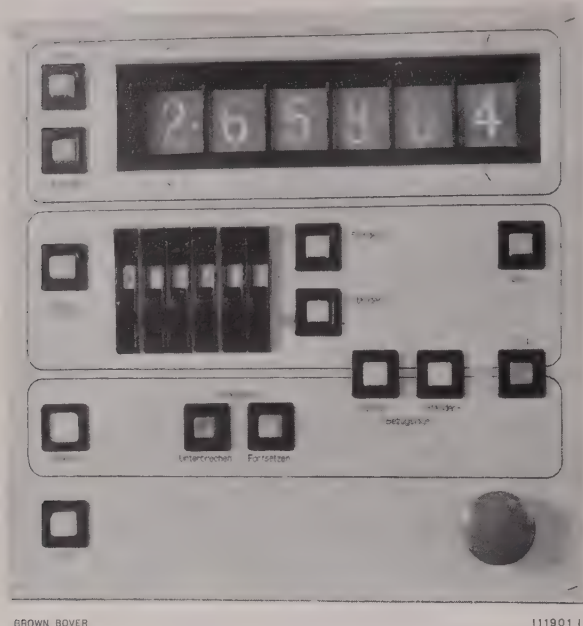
Control panel of a horizontal milling and boring machine equipped with a measuring, positioning and programming device controlled by punched tape
